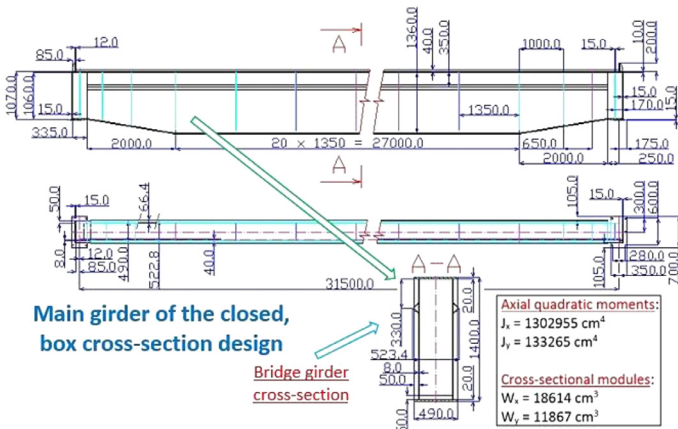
Main girder of two-girder bridge crane 2 × 6.3 t-31.5 m.
